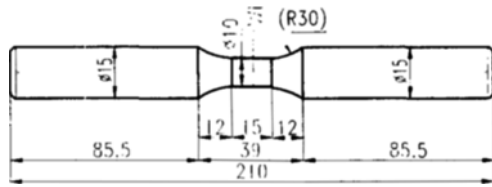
Shape of smooth fatigue specimen (unit: mm)
